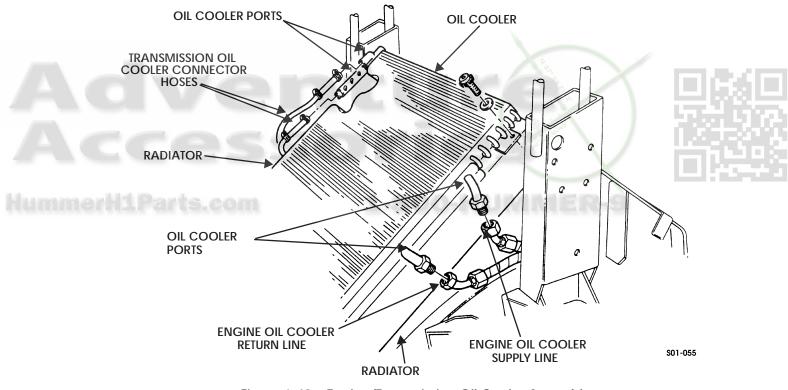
Engine/Transmission Oil Cooler Assembly
